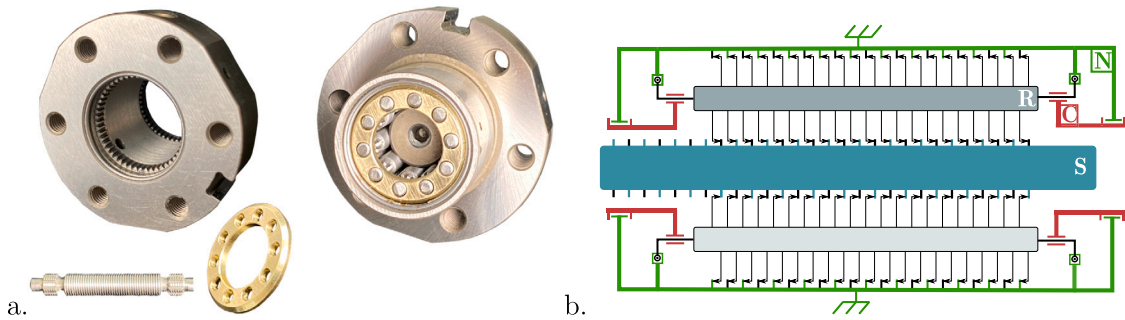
Standard PRS mechanism. a. Photo of each component (left) and assembled mechanism (right) b. Kinematic diagram of a standard PRS mechanism. The nut (green) is in thread and gear contact with the rollers (gray). The rollers and the screw (blue) are in thread contact. The carriers are in sliding pivot link with the rollers and pivot link with the nut. (For interpretation of the references to color in this figure legend, the reader is referred to the web version of this article.)
